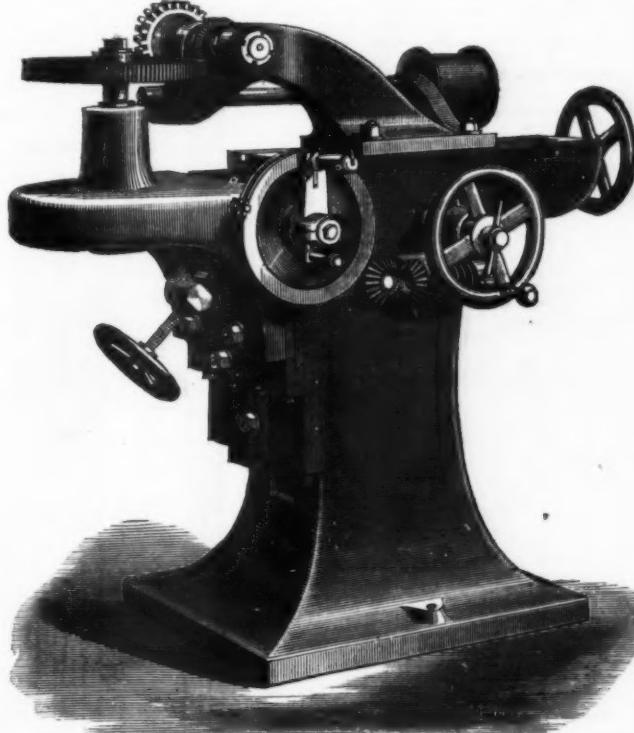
SCOTT'S WHEEL-CUTTING MACHINE.
